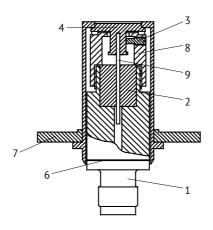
PSA for MP-60, MP-100, MP-250, MP-400 and MP-600: 1 — PSA body; 2 — cylinder; 3 — lock screw; 4 — receptacle; 5 — bell body; 6 — mark; 7 — bell plate; 8 — nut; 9 — piston
